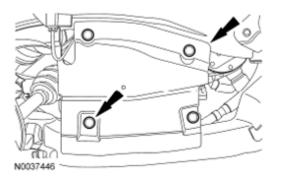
Locating Pin-Type Retainers And RH Splash Shield Courtesy of FORD MOTOR CO.
